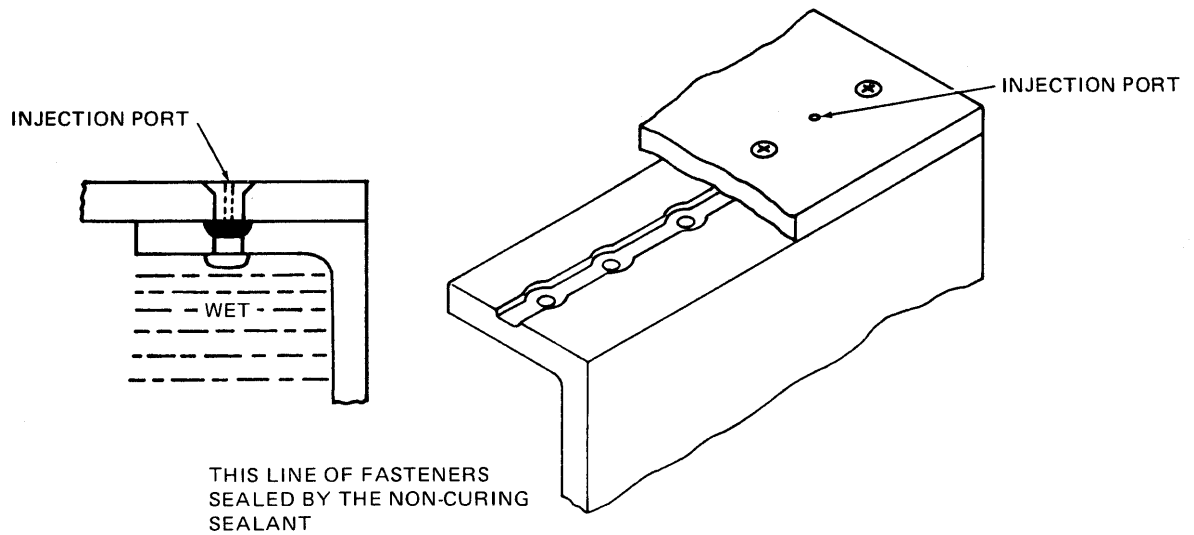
Typical Locations of Grooves/Channels (Sheet 2)
